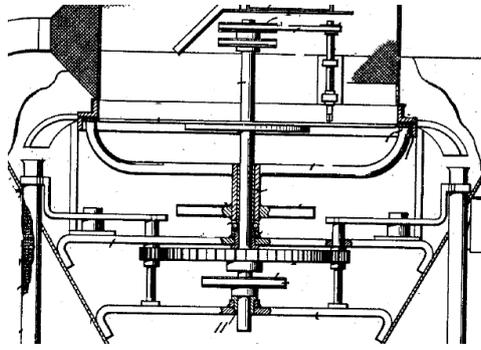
Horizontal Disc and Conveying Ring Design of Centrifugal[4]
